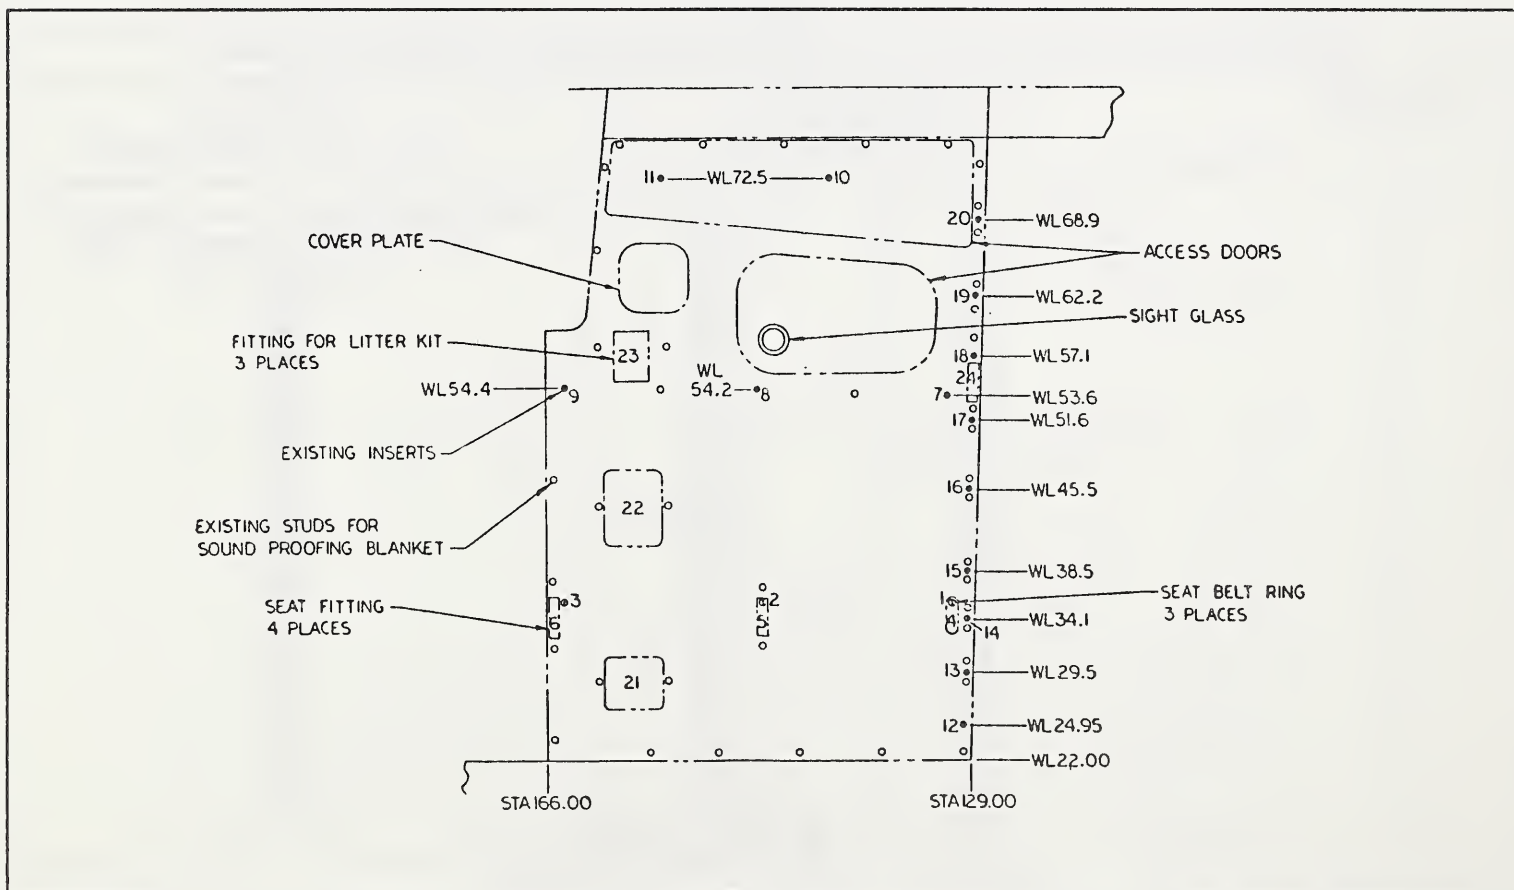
Bell 212 B.L.14 righthand wall fittings.
